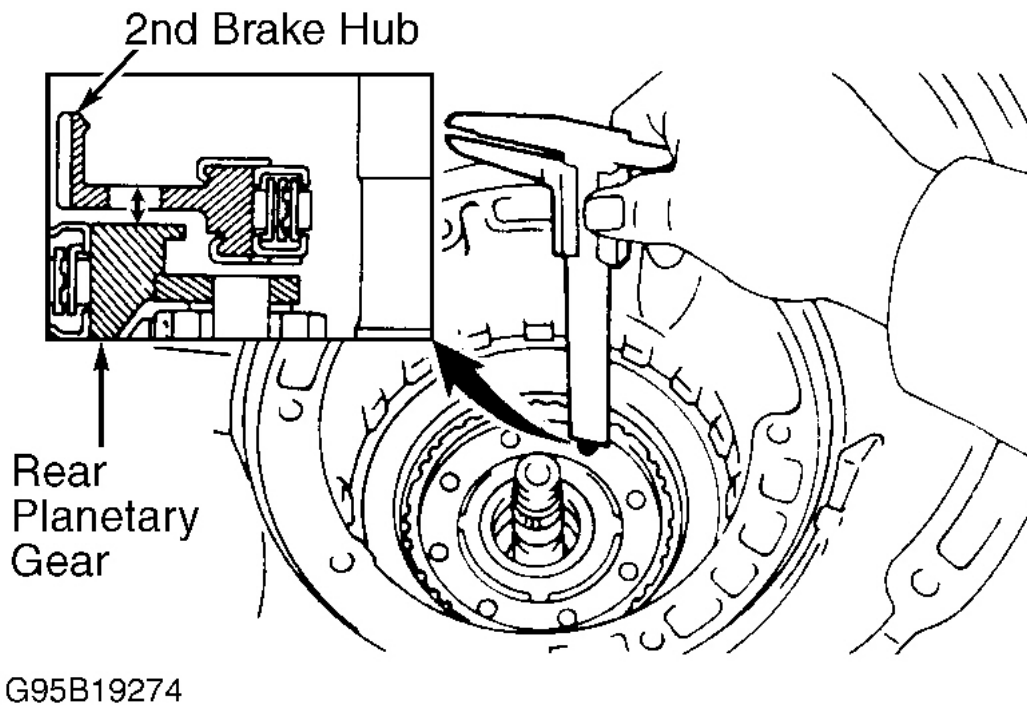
Checking Clearance Between 2nd Brake Hub & Rear Planetary Gear
